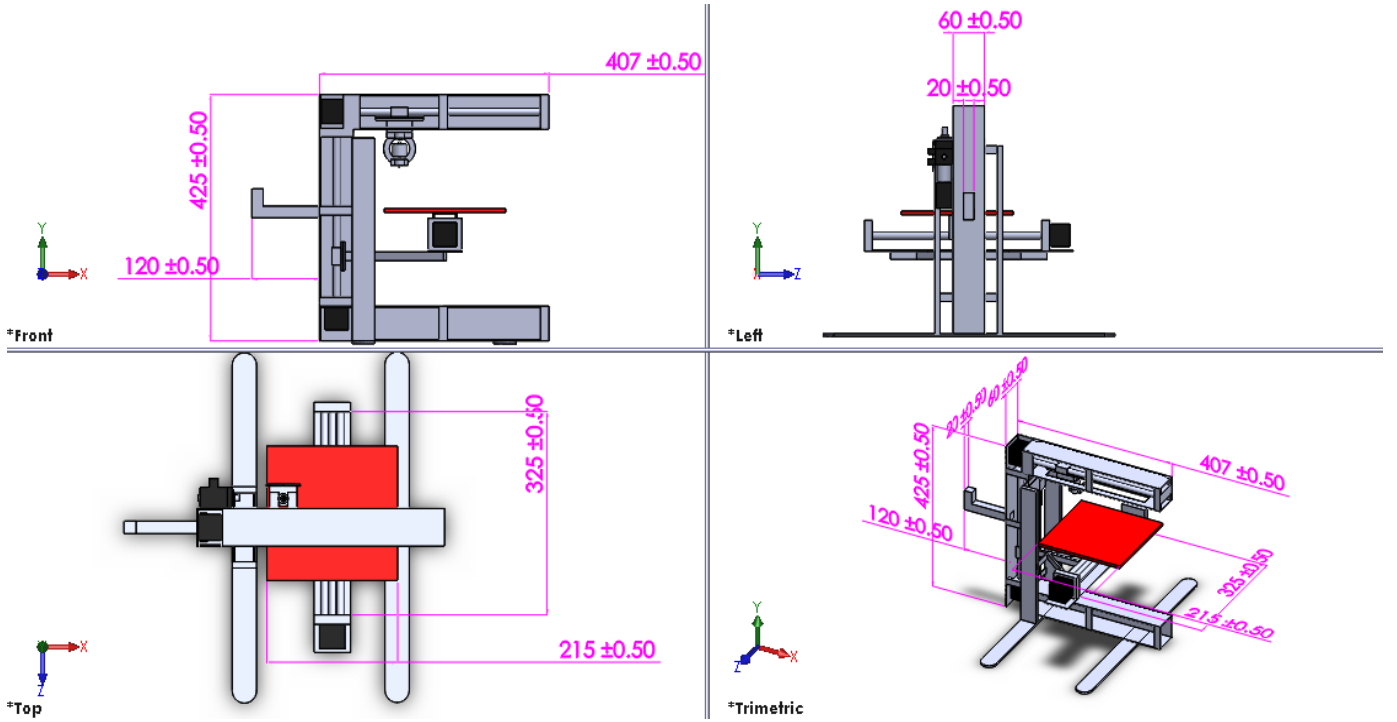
MECHANICAL DESIGN (all dimensions are in mm)
